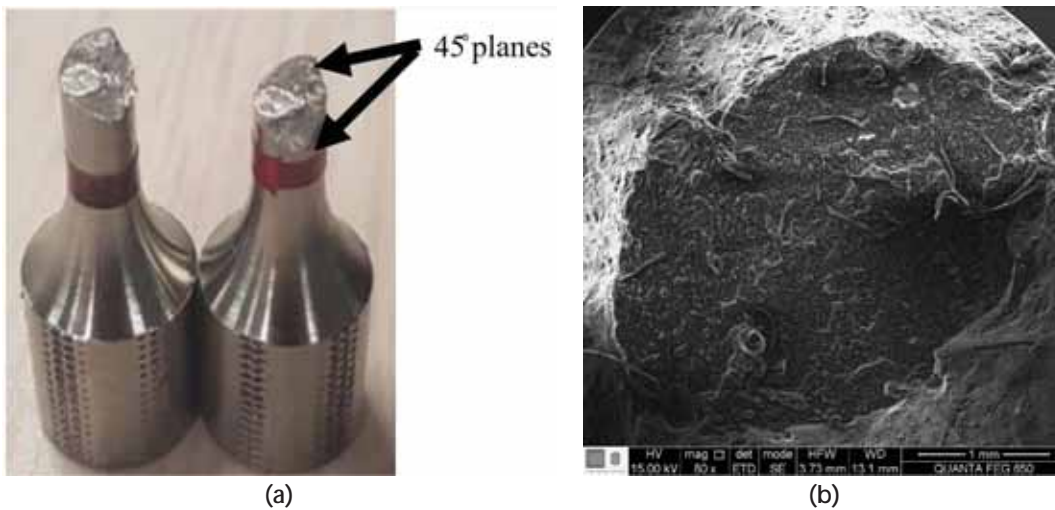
Tensile test: (a) macroscopic aspect of the fracture surface; (b) shear lips planes.
